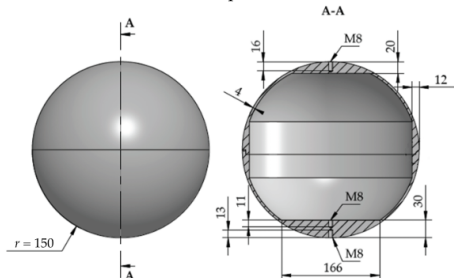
Technical drawing of the sphere. Measurements in mm. Refer to [1] for further details.
